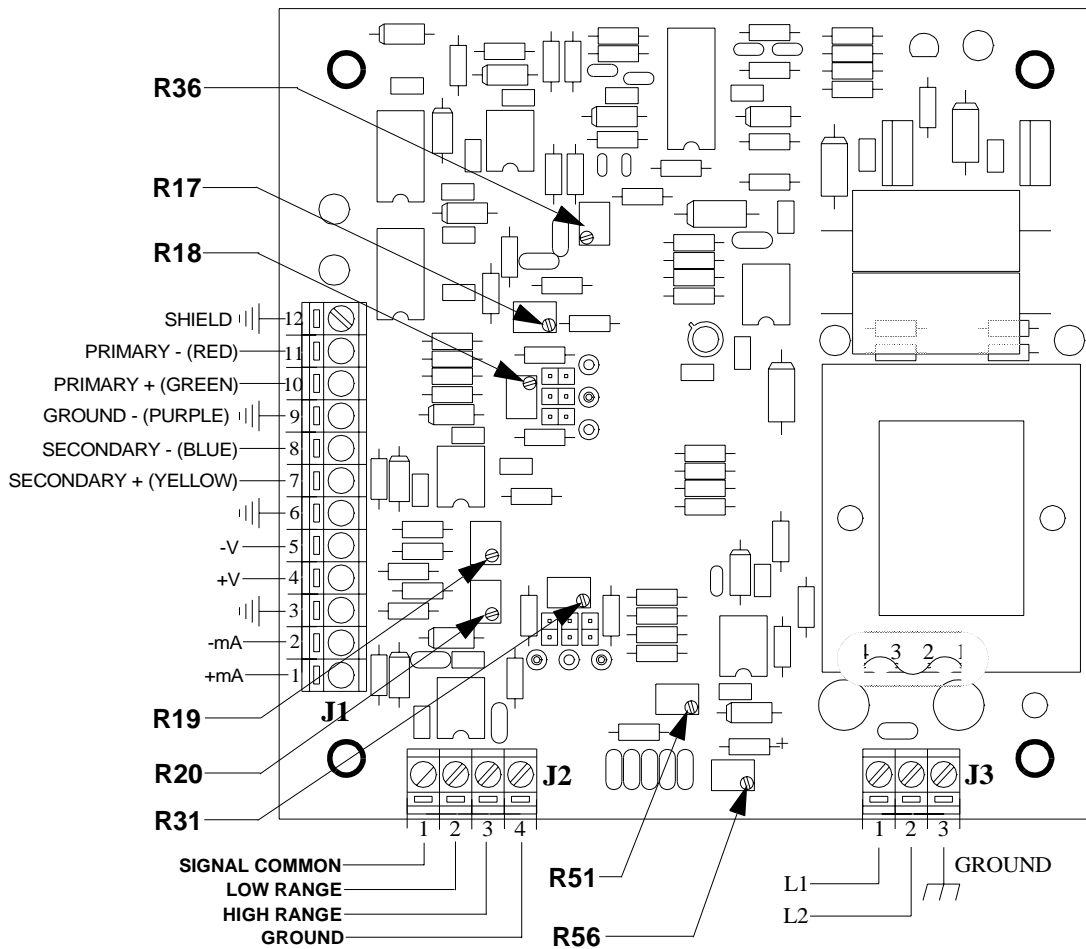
Torque Sensor Electronics Board Adjustment Component Locations
